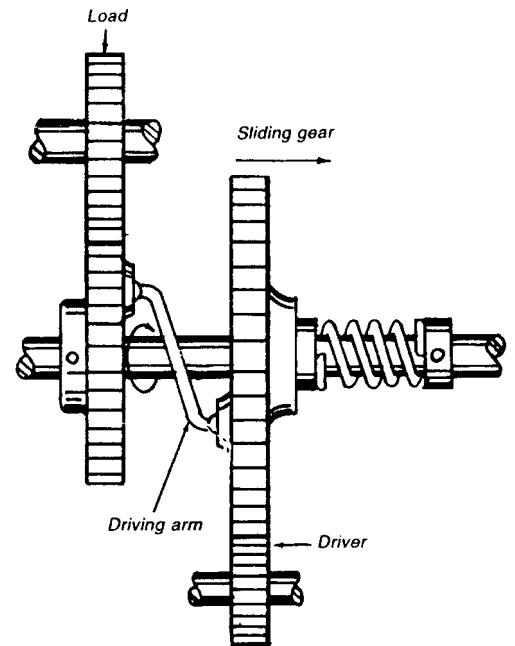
Disengaging gears. The axial forces of a spring and driving arm are in balance in this torque limiter. An overload condition overcomes the force of the spring to slide the gears out of engagement. After the overload condition is removed, the gears must be held apart to prevent them from being stripped. With the driver off, the gears can safely be reset.
